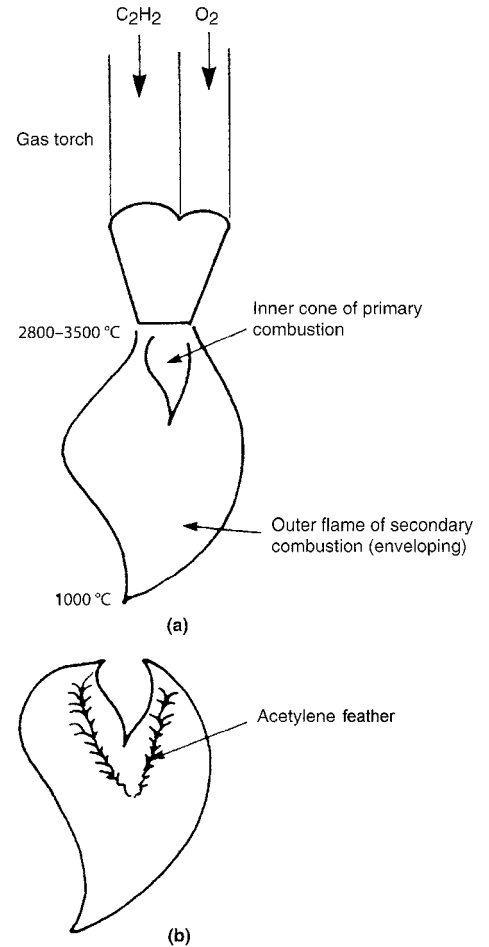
Schematic illustration of a typical oxyfuel gas flame used in welding and cutting, here showing an oxyacetylene flame adjusted to be (a) neutral and (b) reducing. The primary and secondary regions of combustion are shown in (a), while the acetylene “feather” characteristic of a reducing flame is shown in (b). Source: Ref 2
